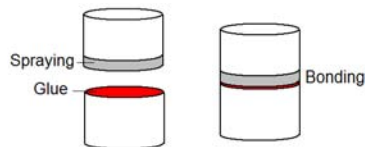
How the specimens were bonded with thermal spraying using the Scotch Weld DP-460 glue from 3M.
